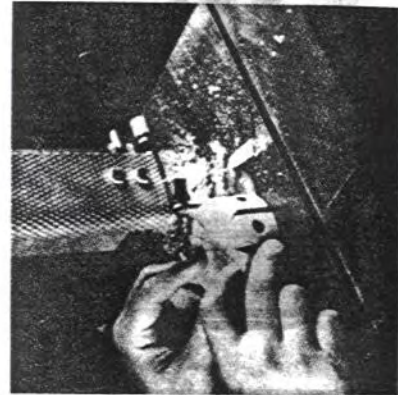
Cut out the wedges in the engine block to create the cylinders. Make the cuts with a bandsaw or scroll saw.
